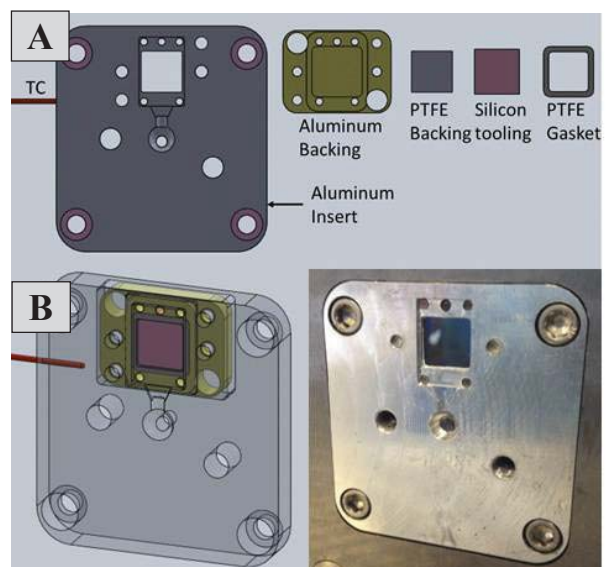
Micromold Aluminum insert assembly exploded (A) and assembled (B). TC = thermocouple.
